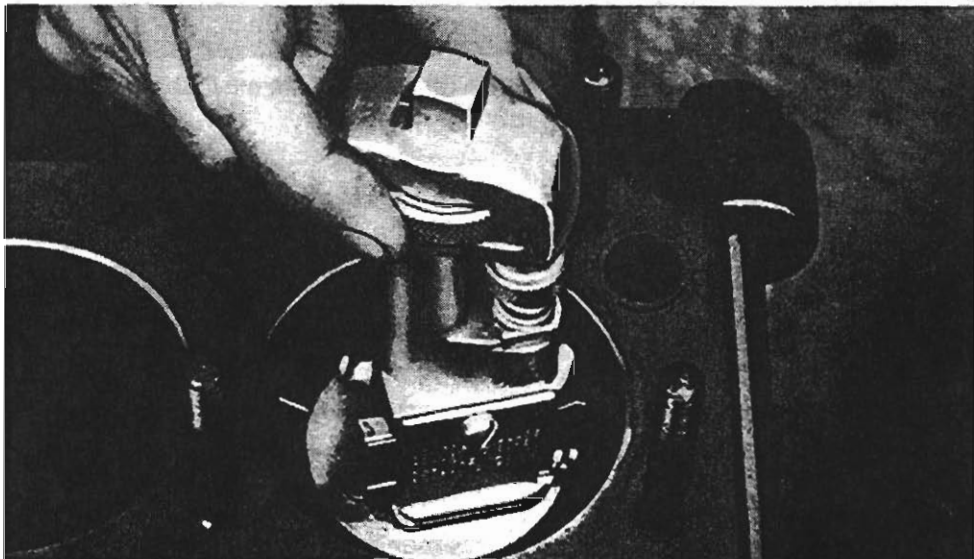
Turn Large Knurled Knob Clockwise Until Jaws of Centering Head Support the Weight of the Tool.
